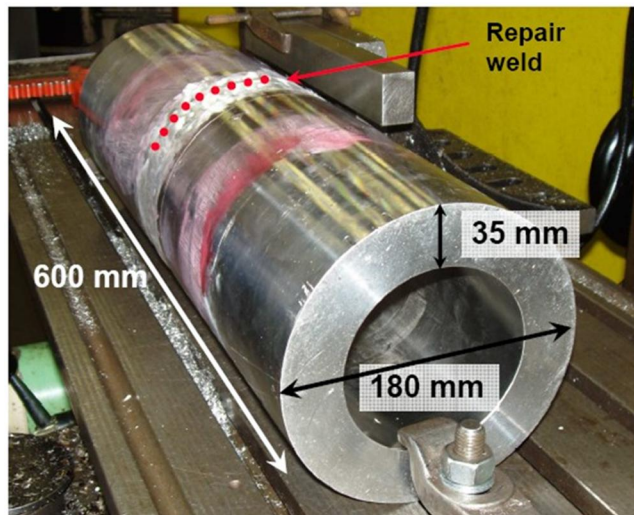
The overall geometry of the examined Mock-up 2 [2].
